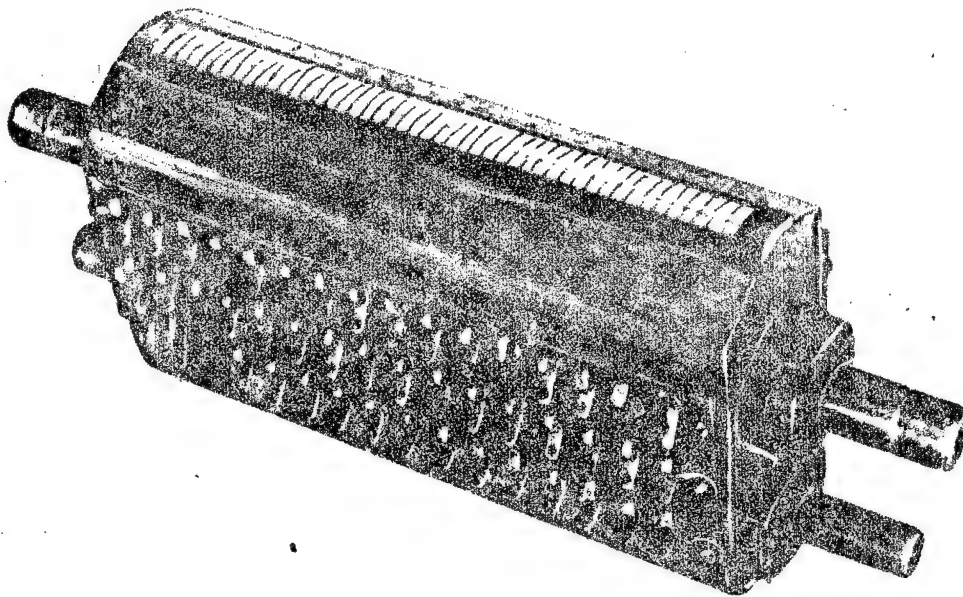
Design of an assembled unit consisting of 47 separate magnetic heads.
